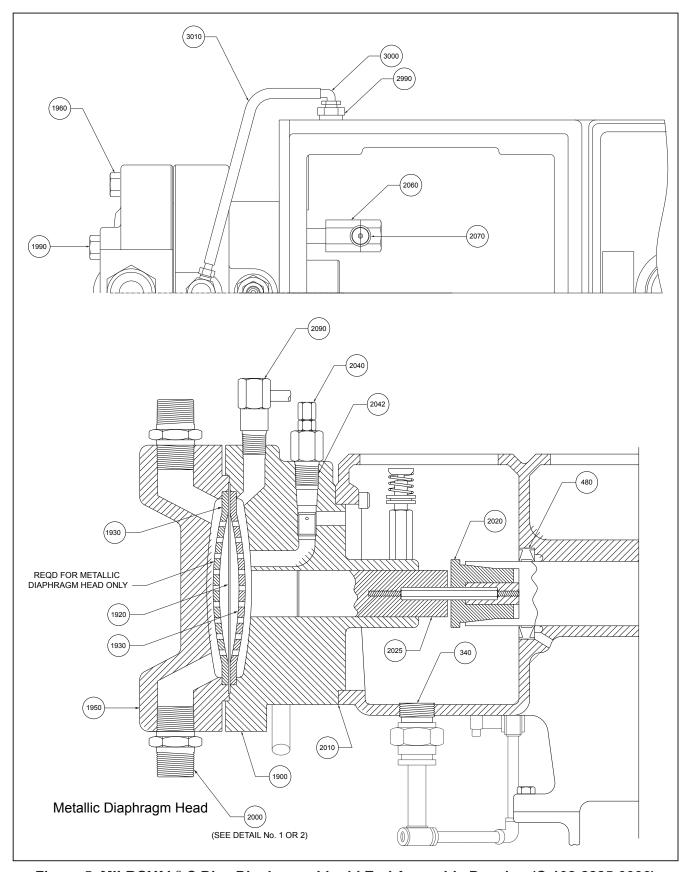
MILROYAL® C Disc Diaphragm Liquid End Assembly Drawing (C-102-2285-0006)
